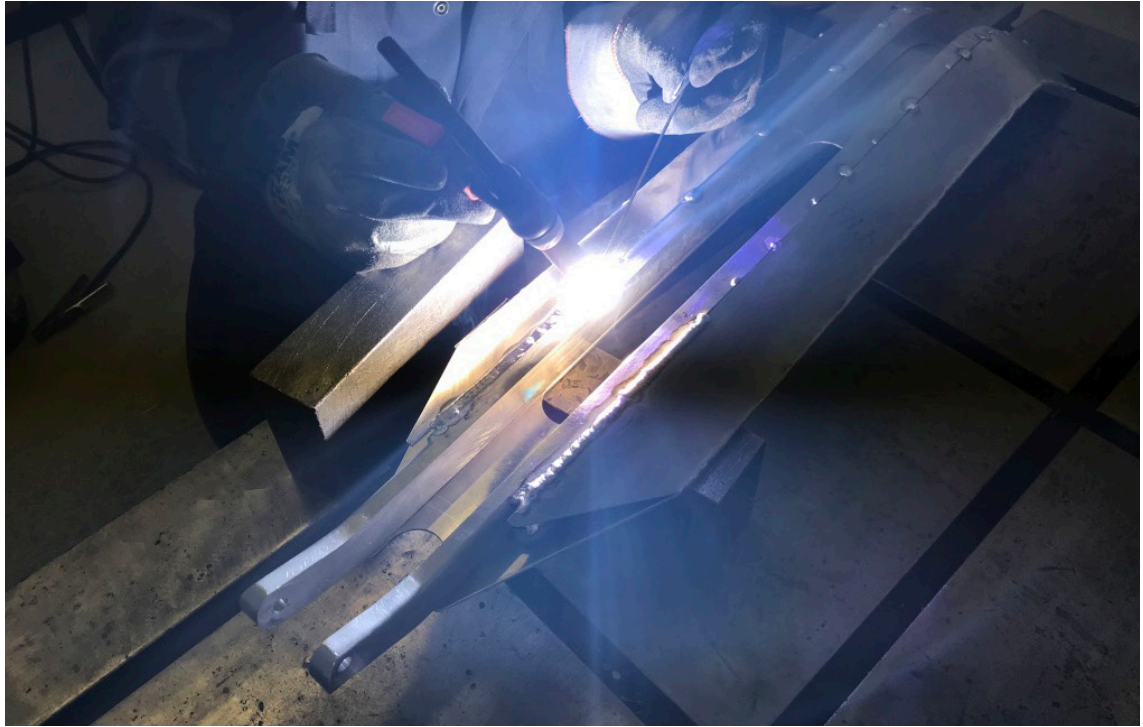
(top) TIG welding sheet aluminium to simulate the extruded profile
